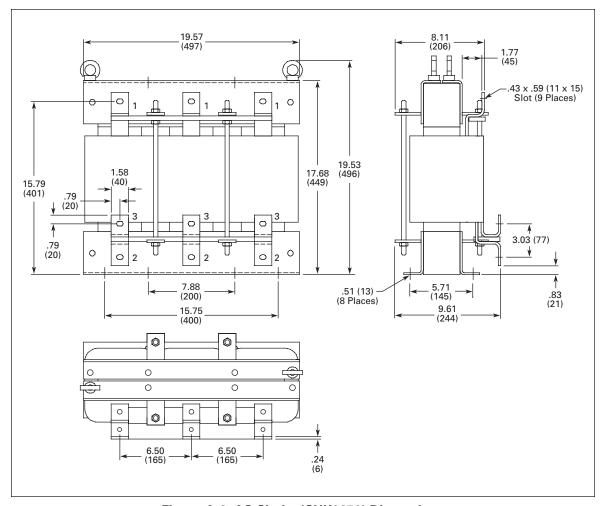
AC Choke (CHK0650) Dimensions Approximate Dimensions in Inches (mm)
